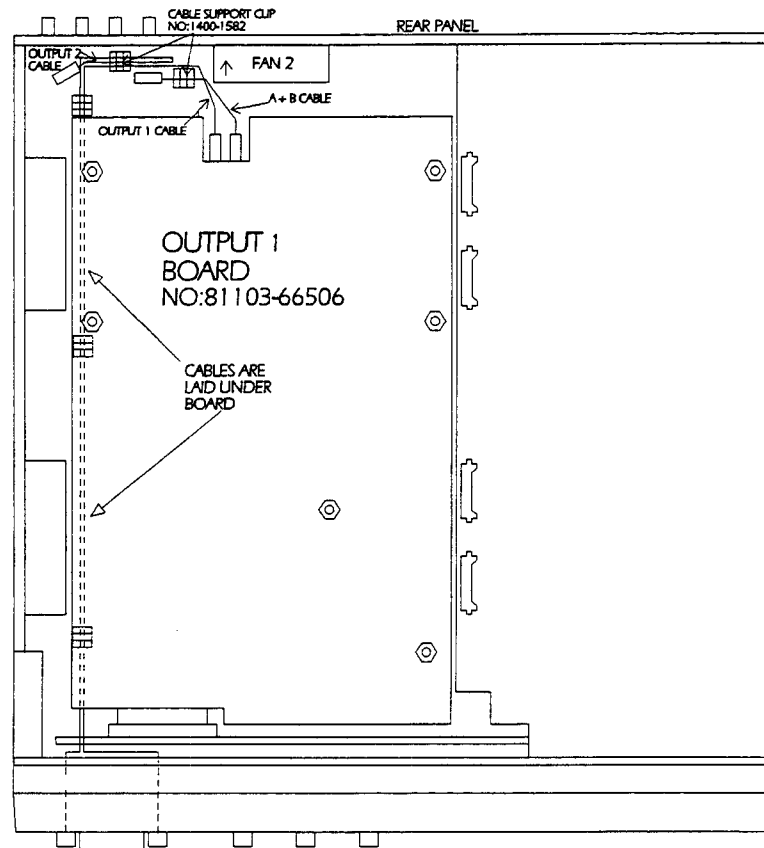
Underside View of HP 8110A showing Output 1 board
